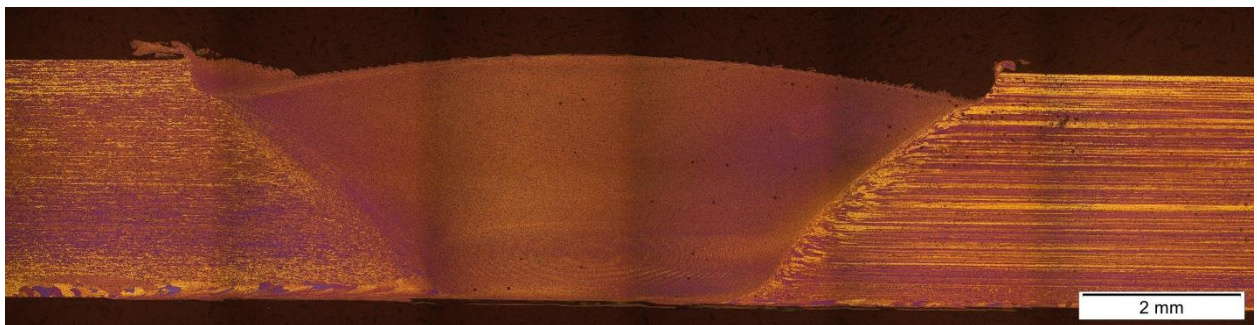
Polarised light metallographic montage showing the complete weld zone in specimen T6 tested in torsional fatigue.
